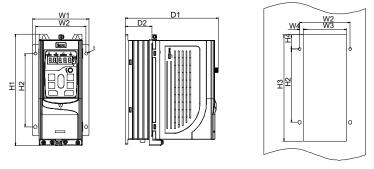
380V 1.5-7.5kW VFD flange mounting diagram
